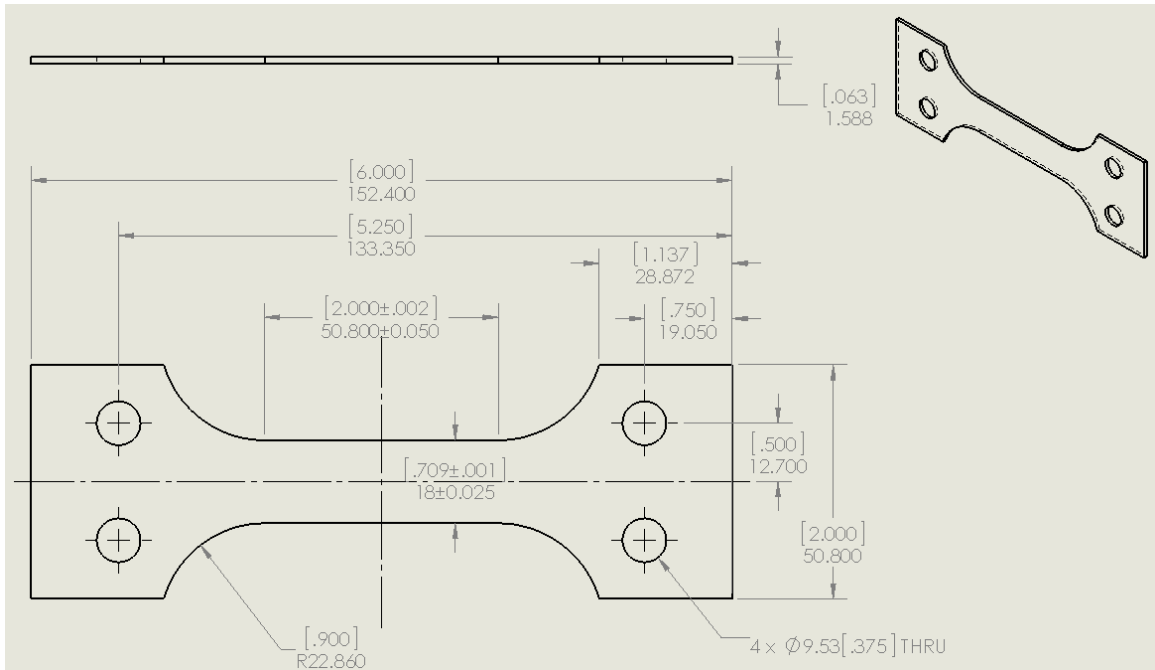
Technical drawing of the 18mm-width specimen without groove (Courtesy of James Gose and Haocheng Pan).
